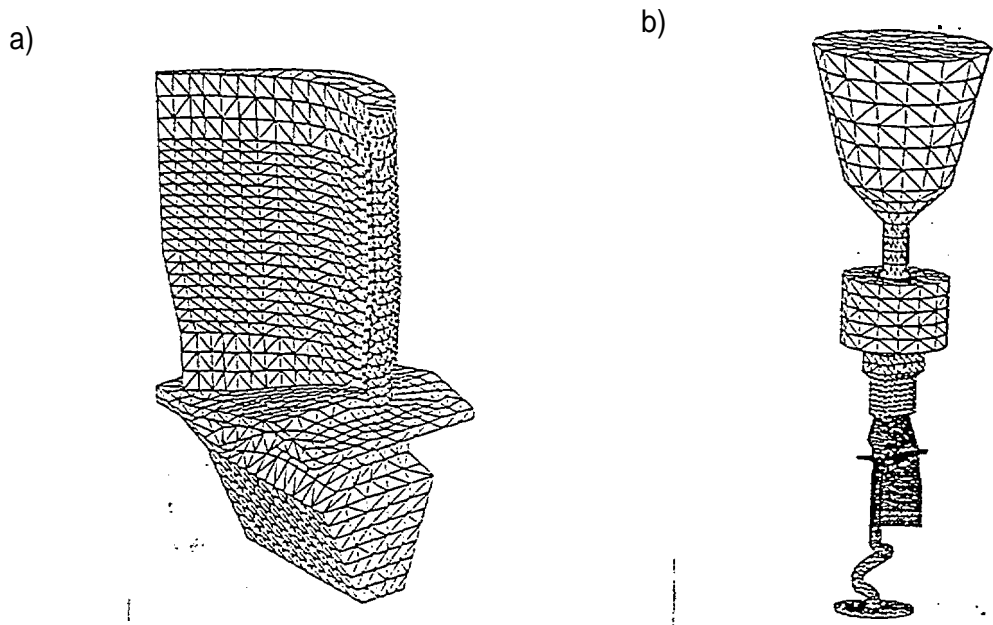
Surface mesh of a real blade a) blade b) whole casting
